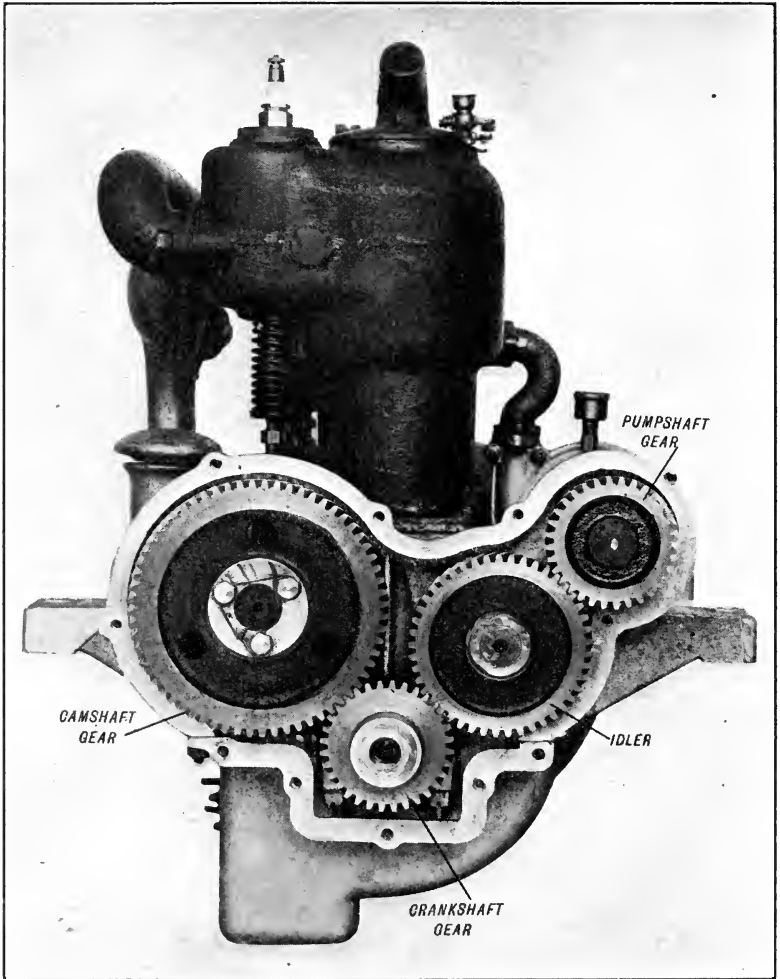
Front View of Warren-Detroit "30" Motor with Timing Gear Case Cover Removed to Show Arrangement of Cam Shafts and Water Pump Driving Gears.
